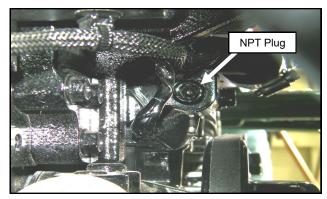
(Remove NPT Plug from Engine) (zoomed-in view of image above)
